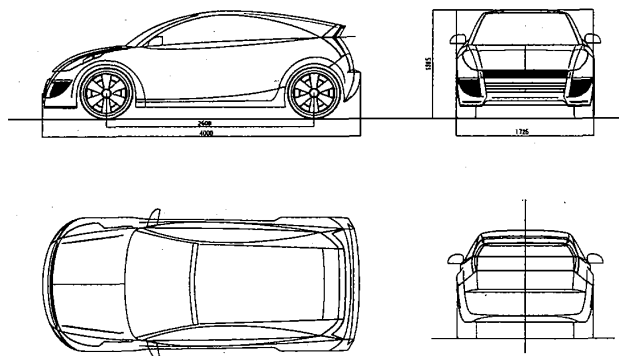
Technical drawings of the top example of Figs. 6 and 7
